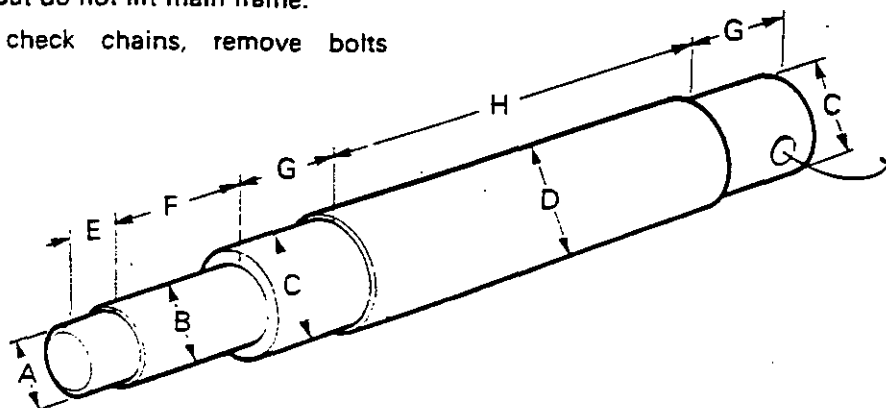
CLUTCH PLATE PILOT — 1200 TRACTORS
